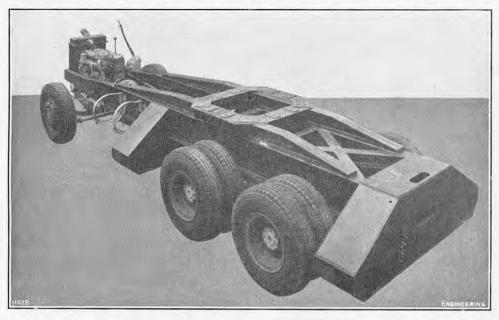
Crane Chassis, with Leyland "Hippo" Components.
